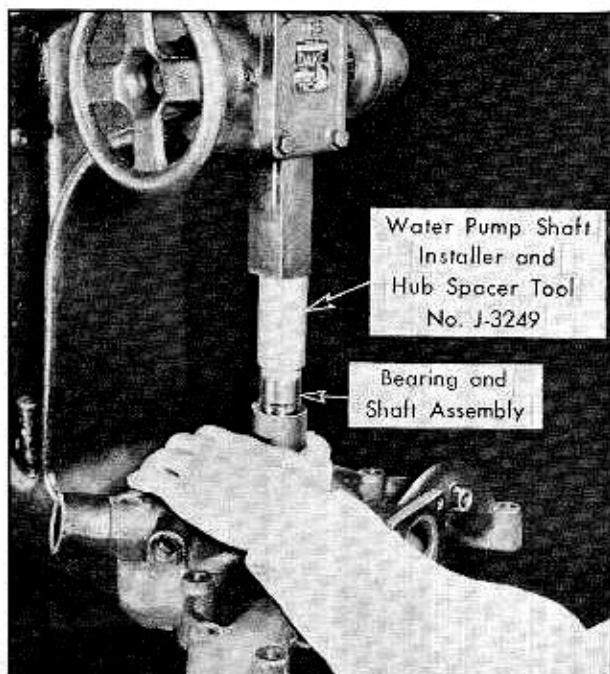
Pressing Bearing and Shaft Into Pump Housing
